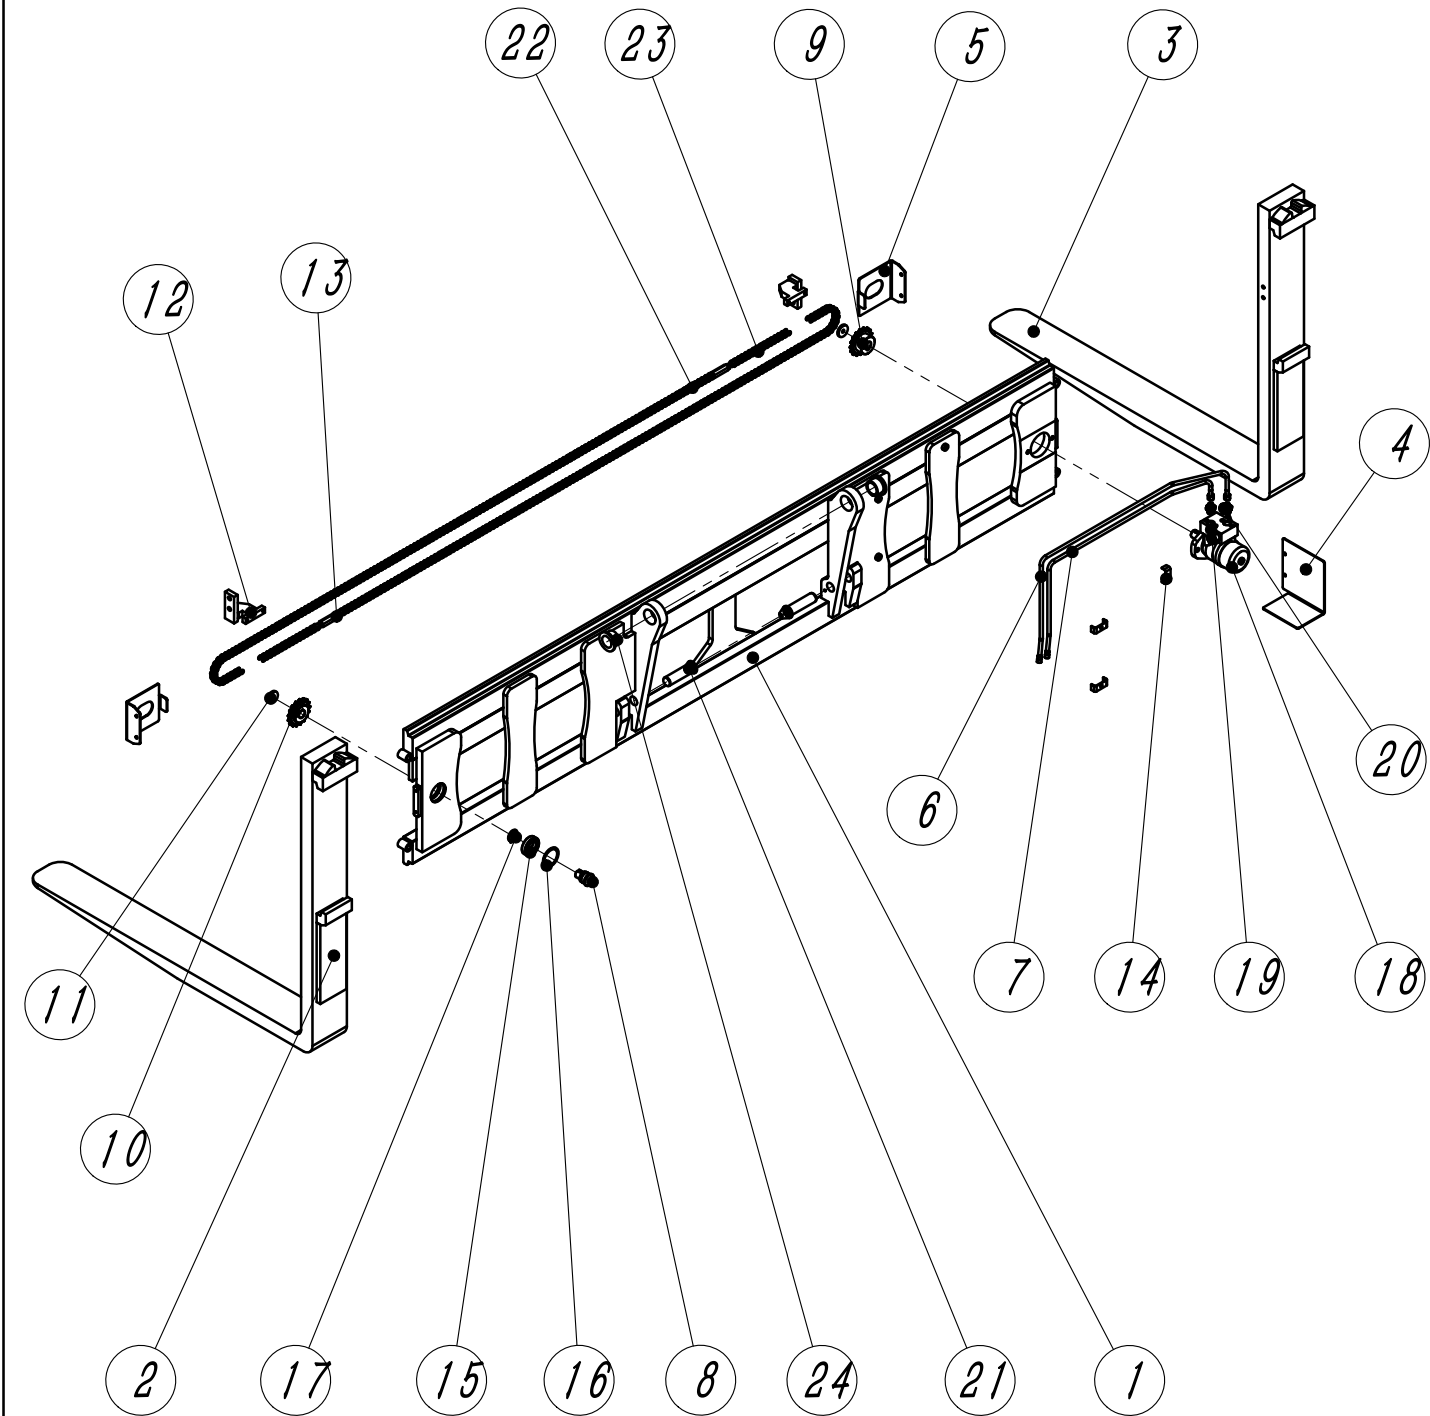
MQC35.2.4SQ-ZP Inner slide carriage assembly
